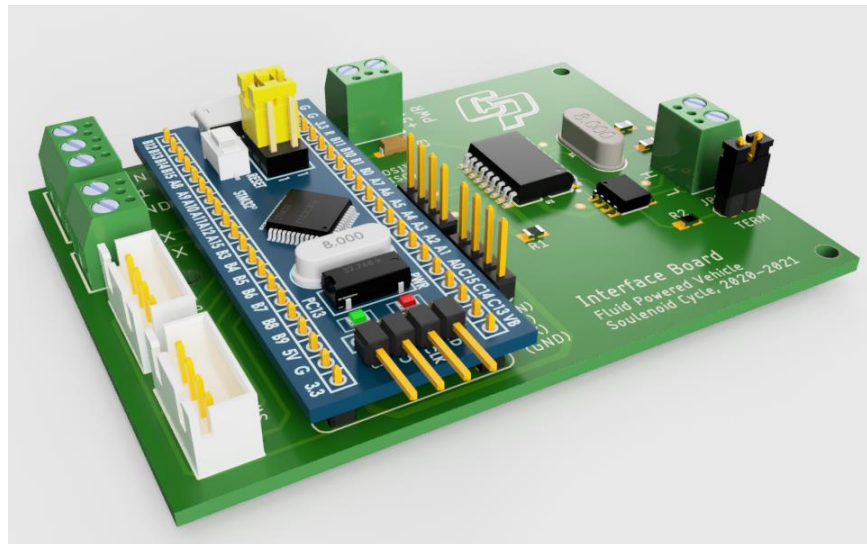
Render of final PCB design, populated with 3D models of electrical components.
